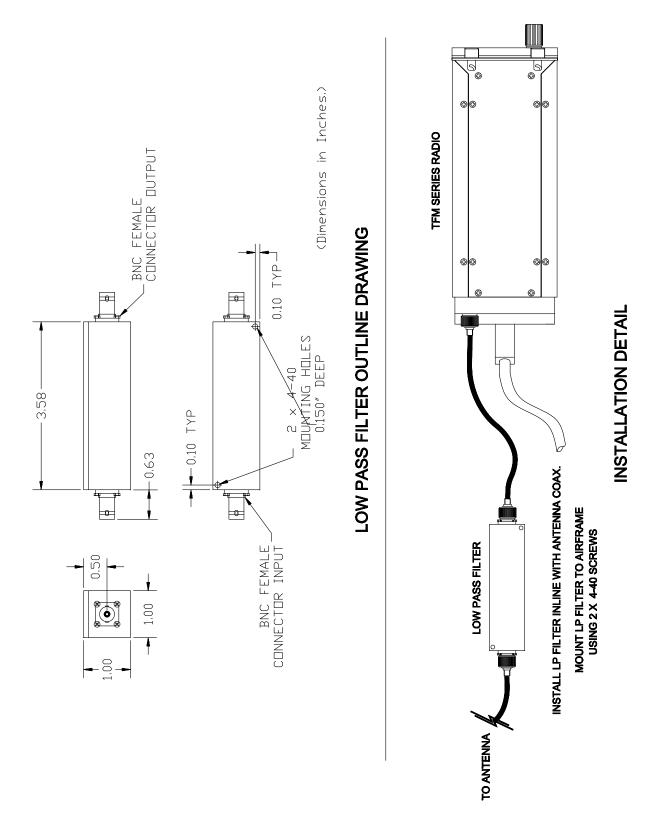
Low Pass Filter Outline Drawing and Installation Detail
